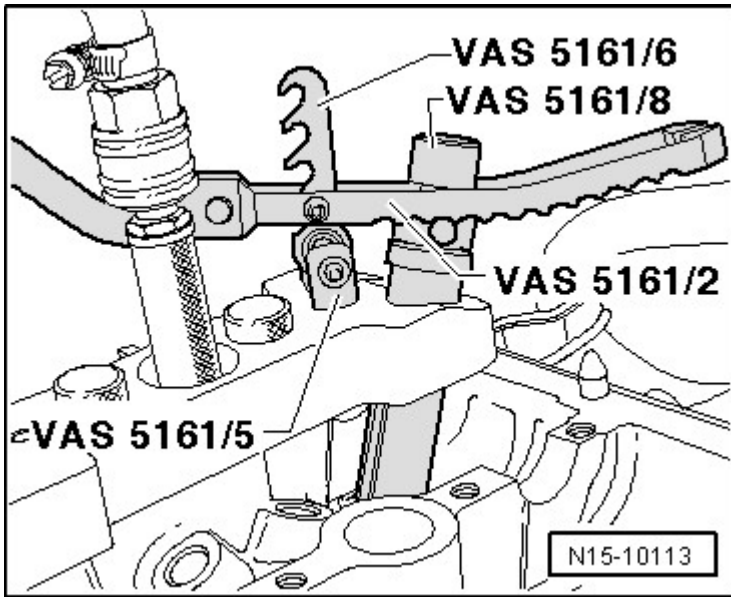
Identifying Engaging Device VAS 5161/6 With Installation Forks VAS 5161/5 Installed Into
